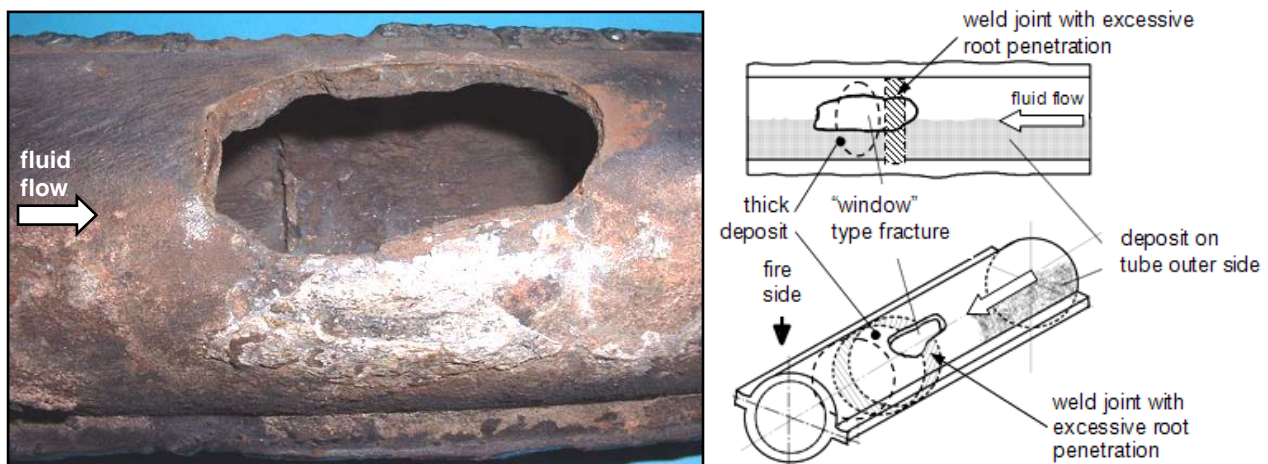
Macro photo of "window" type fracture with schematic view of the specimen
